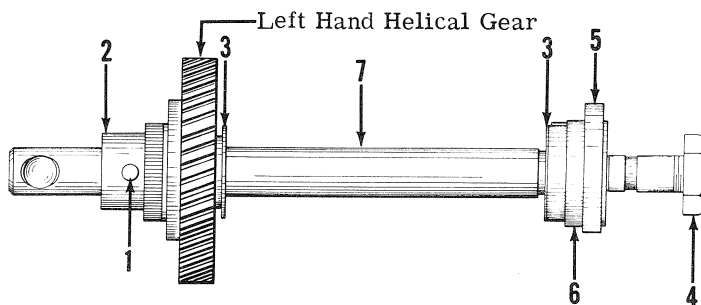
A. SHAFT ASSEMBLY - LATERAL CAM
